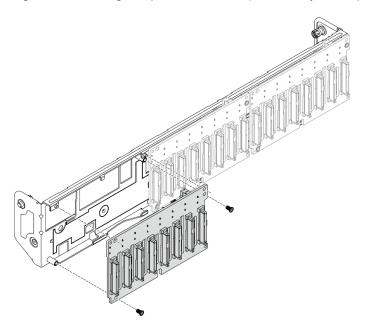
Removing backplane from carrier (E3.S bay chassis)
